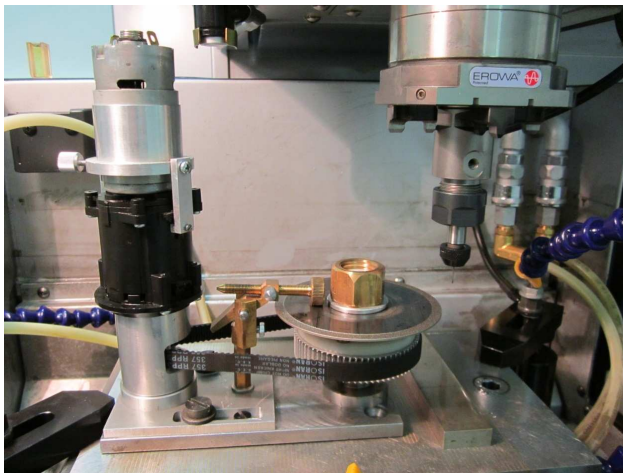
Spinning disc tool system fixed in EDM machine SODICK APIL machining tank ready to machine 1 mm diameter tungsten raw electrode clamped in the spindle.
